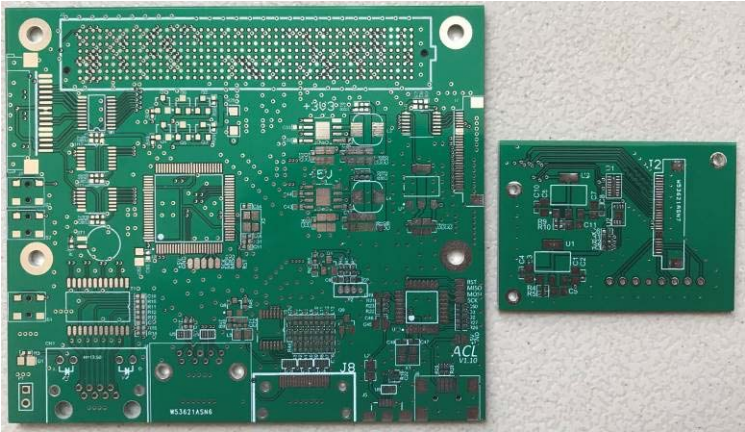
Fabricated PCB V2.0 and twin-camera daughter board
